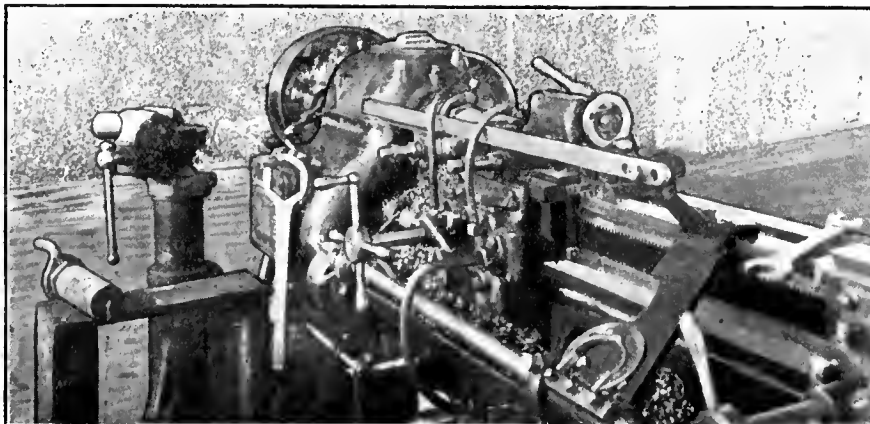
ROUGH TURNING SHELLS ON A FITCHBURG MACHINE CO. "LO-SWING" LATHE.
